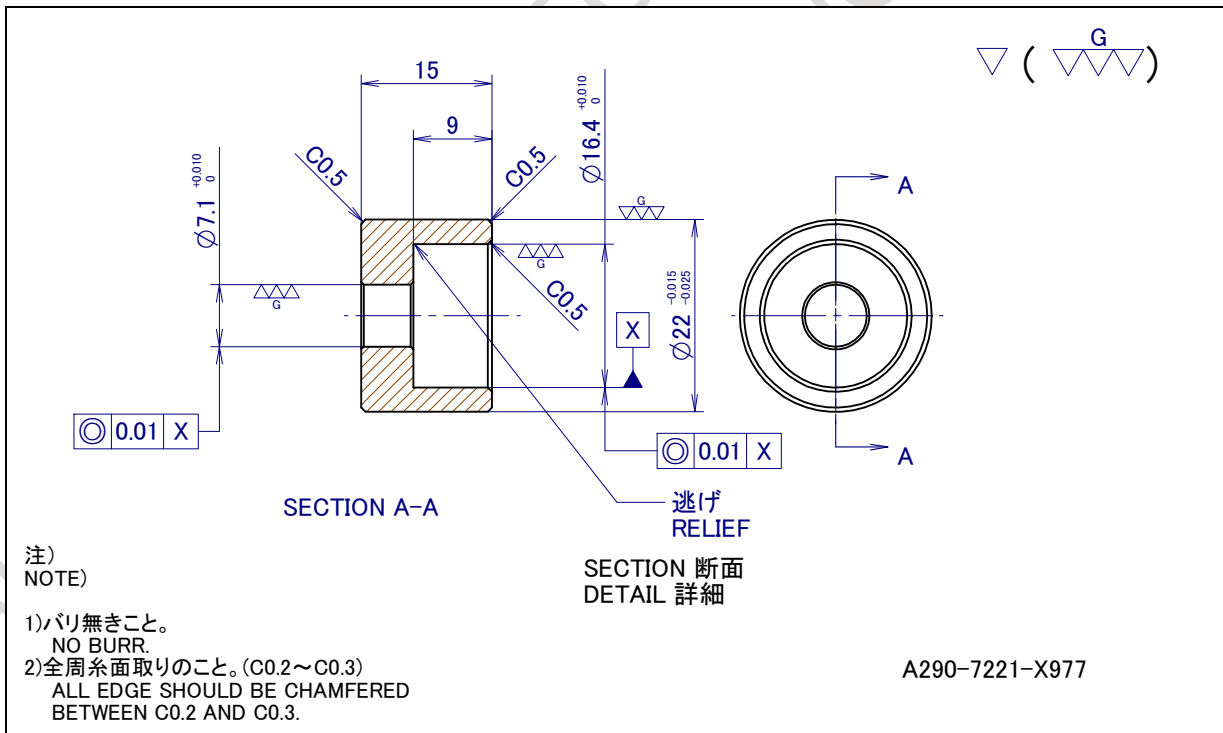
(l) Mounting fixture for gear of J3-axis motor
